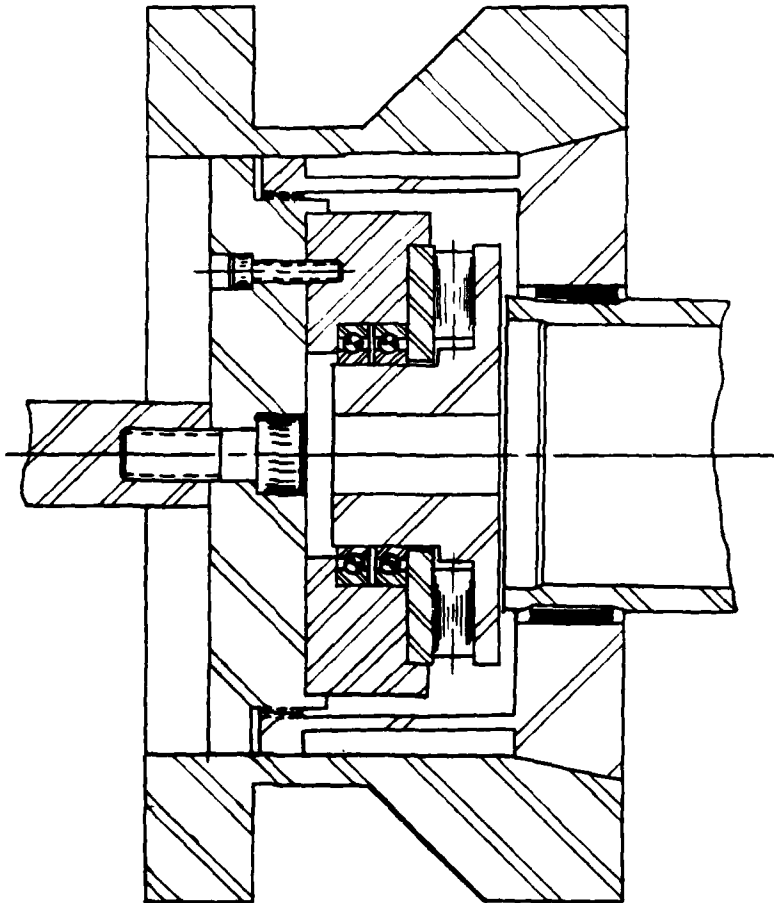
COLLET GEOMETRY OF INERTIA WELDER AT
